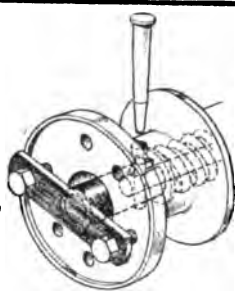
A—Another form of clutch spring compressor, somewhat simpler than that shown in Fig. 1
